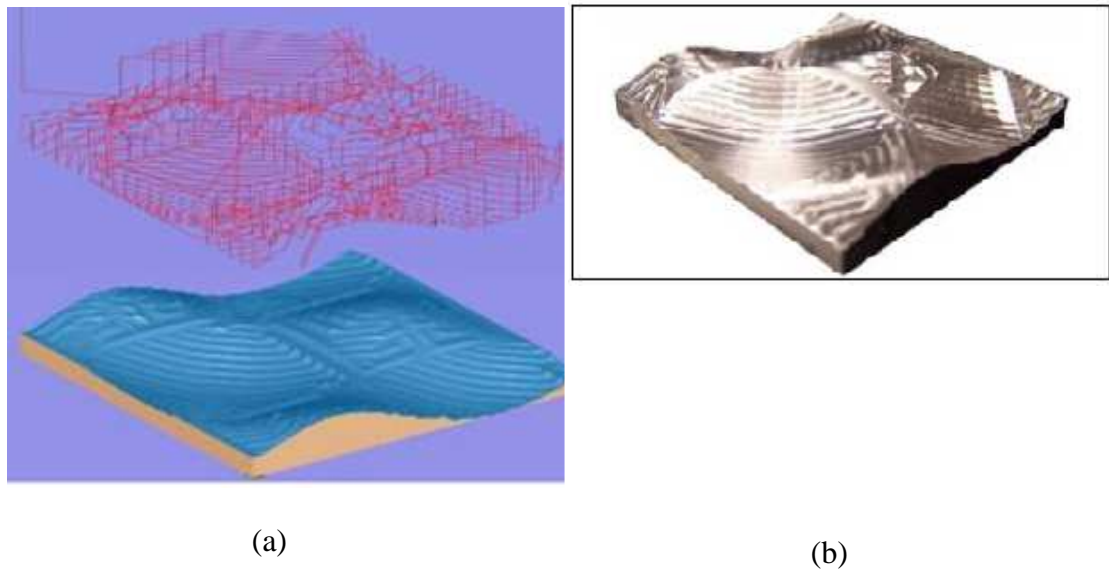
Simulated and machined free form surface and optimized tool path in 3D.
